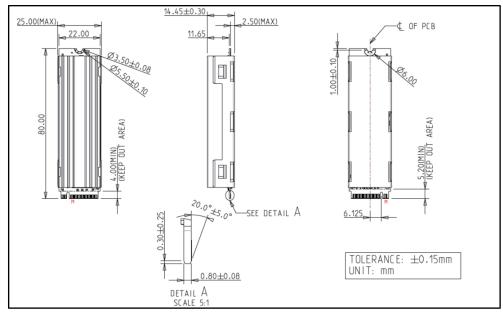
Innodisk M.2 (P80) 4IE2 mechanical drawing with heatsink diagram
